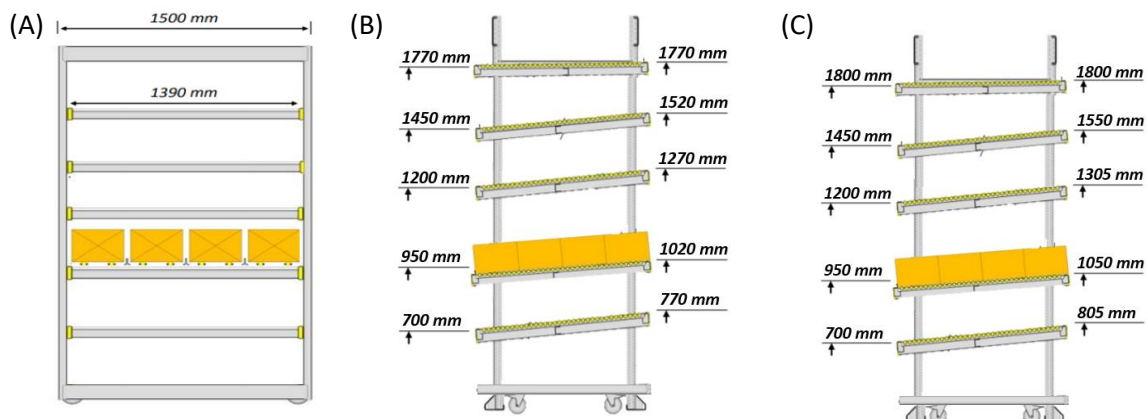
(A) Front view; (B) Side view rack S; (c) Side view rack B
